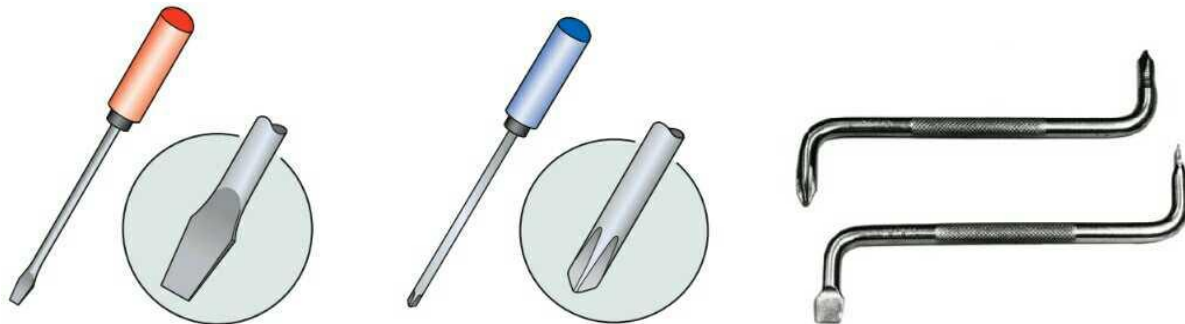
a) Flat Screwdriver. b) Phillips screw driver c) Standard offset screwdrivers.
